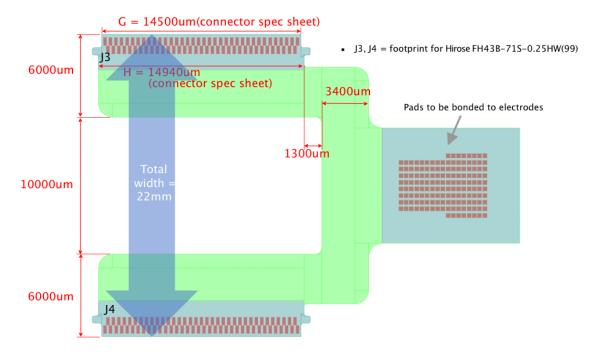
Flexible PCB routing the channels between the probe and the 128-channel modules
